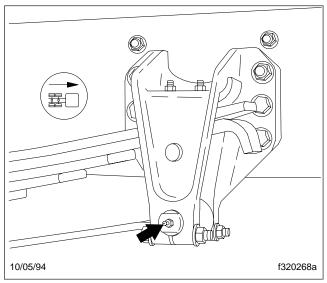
, Forward Spring Bracket Spring Pin Grease Fitting
